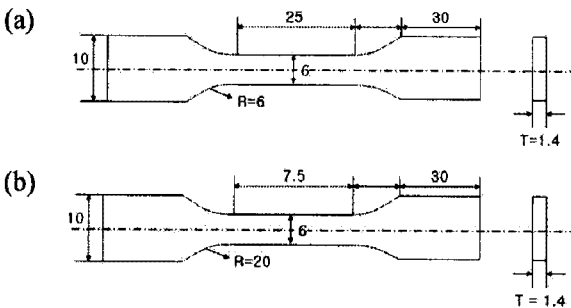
Dimension of (a) tensile test specimens and (b) low cycle fatigue test specimens
